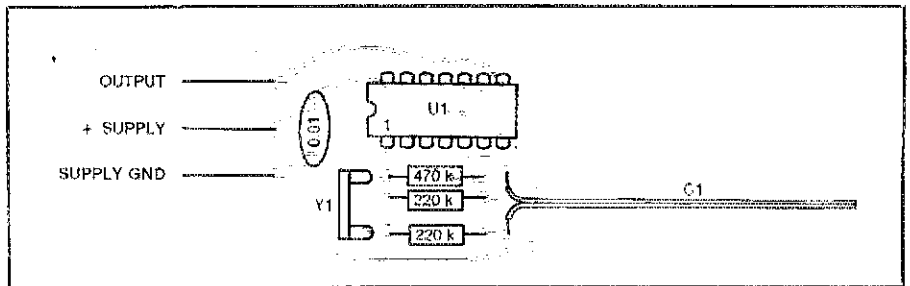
A parts-placement diagram, shown from the component side of the board. Gray areas show an X-ray view of the copper pattern.
